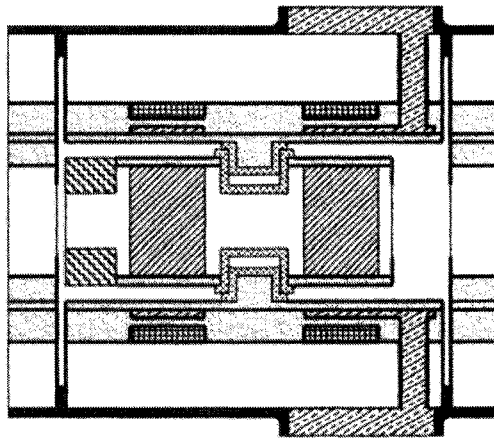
Assembly & encapsulation step 4 – vacuum sealing.
